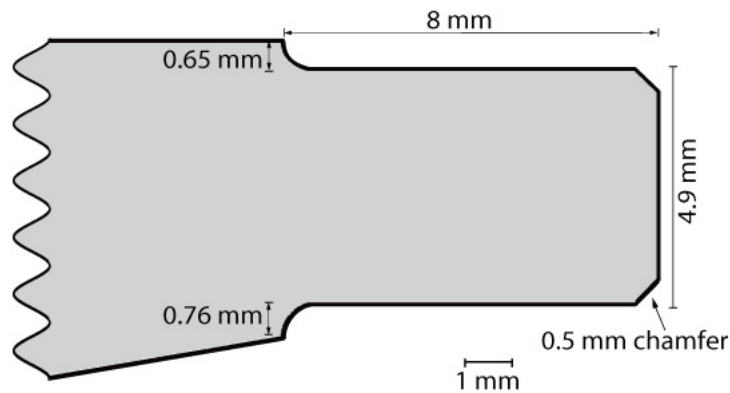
Cross-section of the perimeter of the ACTPol lens 2, which is designed to enable machining of the AR coating and clamping the lens without damaging the AR coating. Figure courtesy: Michael Niemack
